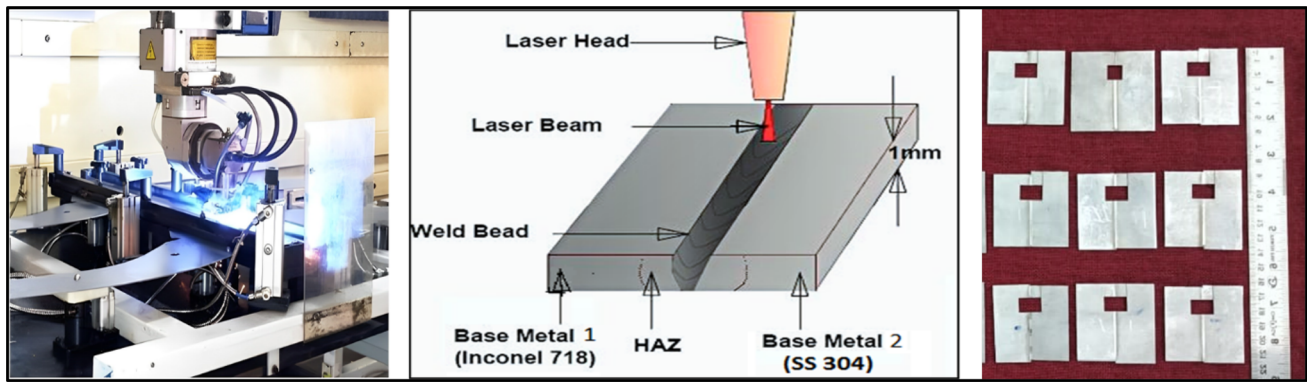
Schematic of laser welding (Inconel 718 and SS304)
